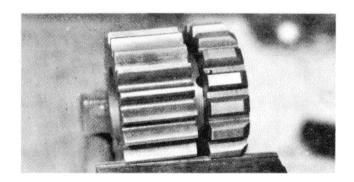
Auxiliary Drive Gear / Clutch Gear Assembly
